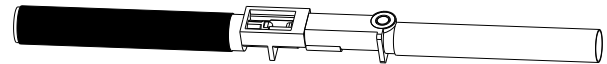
Hydraulic assembly: Includes cylinder tube, pump body, and black bladder tube
